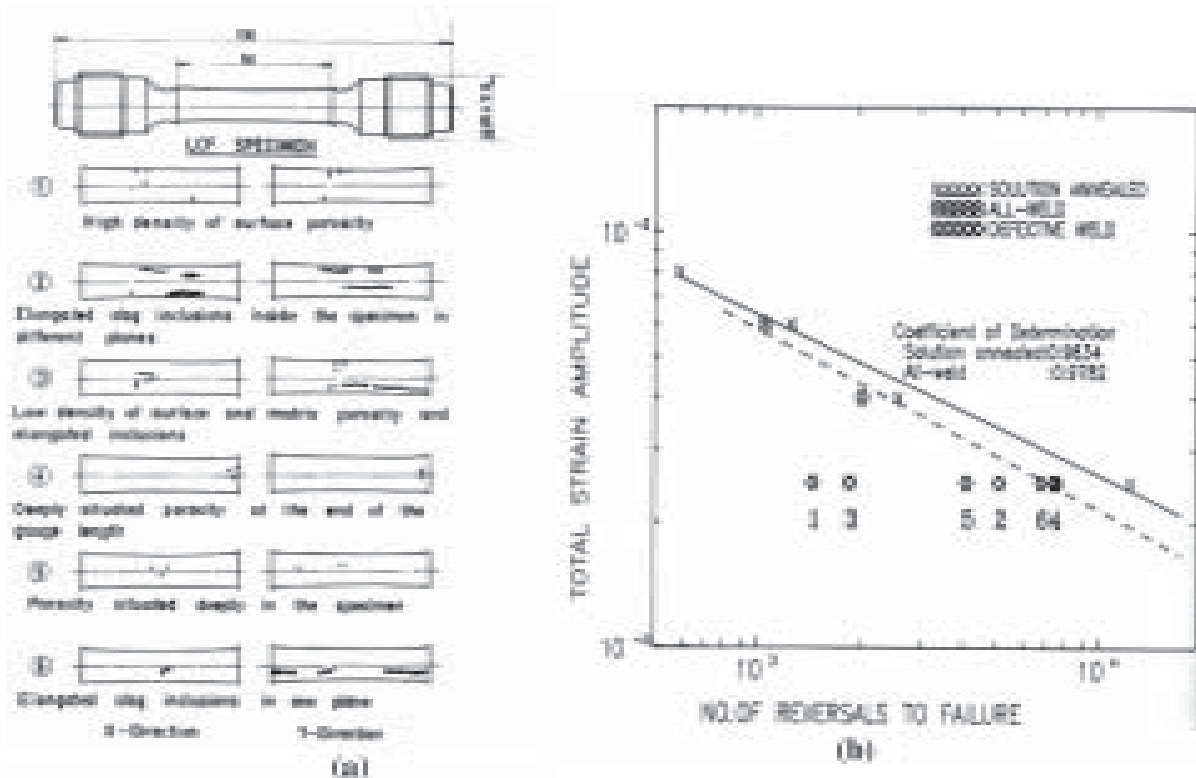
a) Description and location of defects in LCF specimen of weld metal and b) Strain-life plots of 304 SS base and 308 SS sound weld and defective weld metal. Numbers at data points refer to the samples<sup>68</sup>
